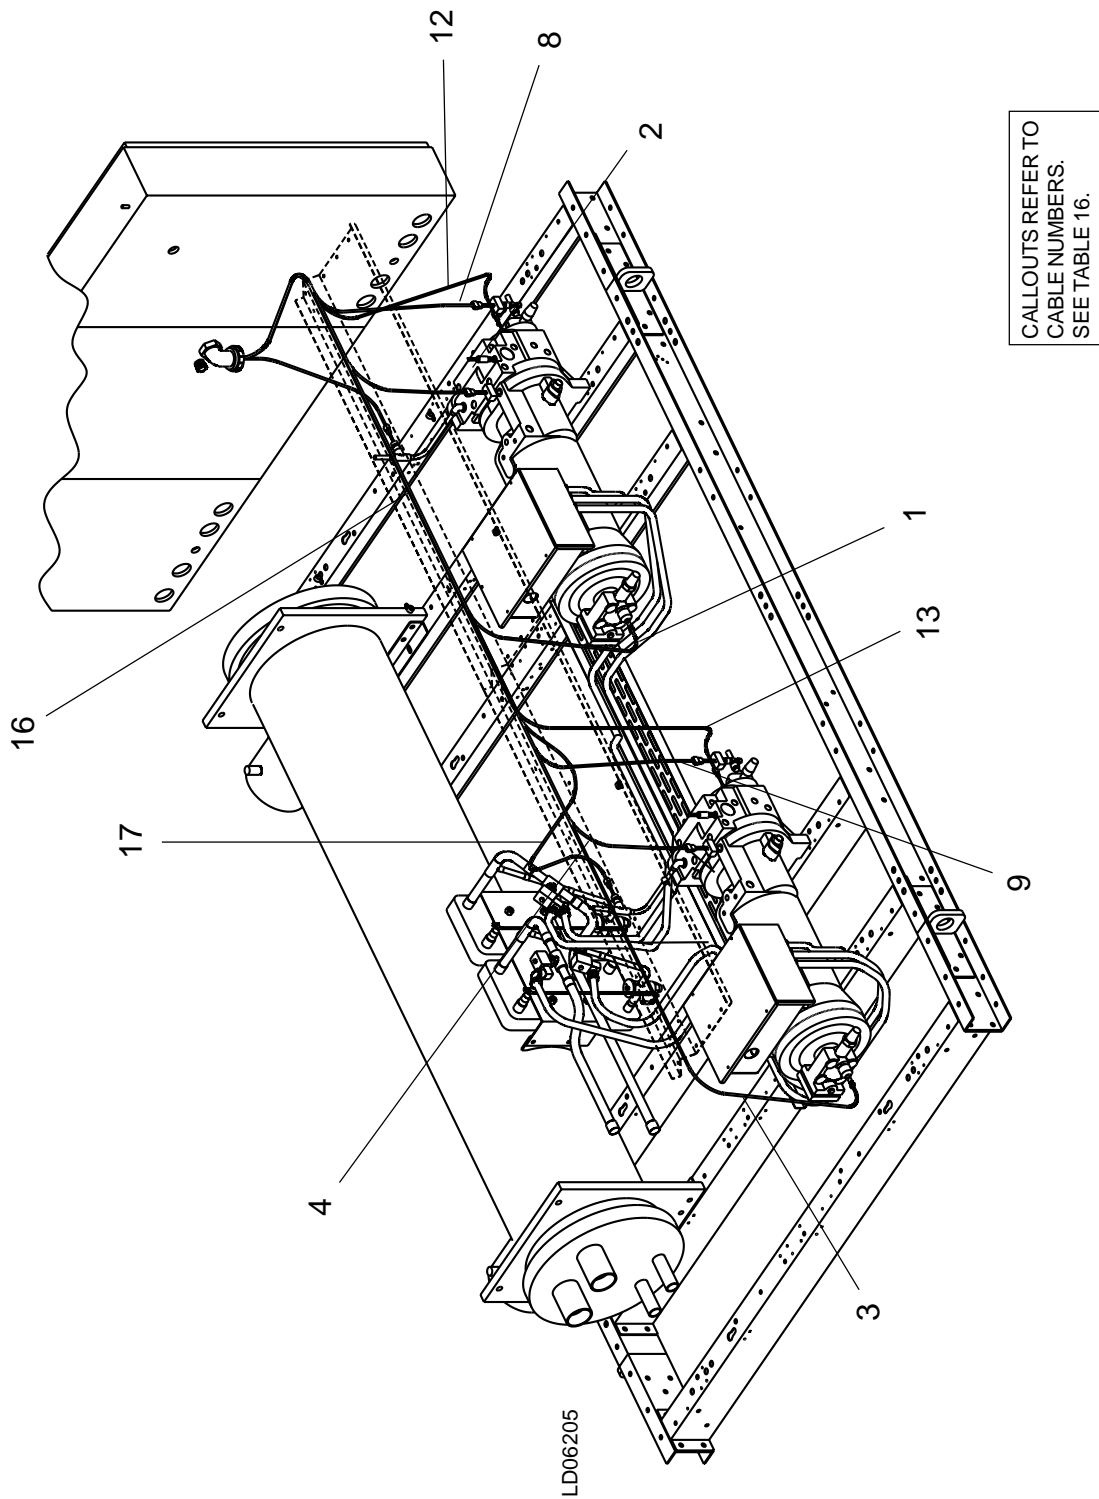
HARNESS LAYOUT (REF. TABLE 16, PAGE 33)
